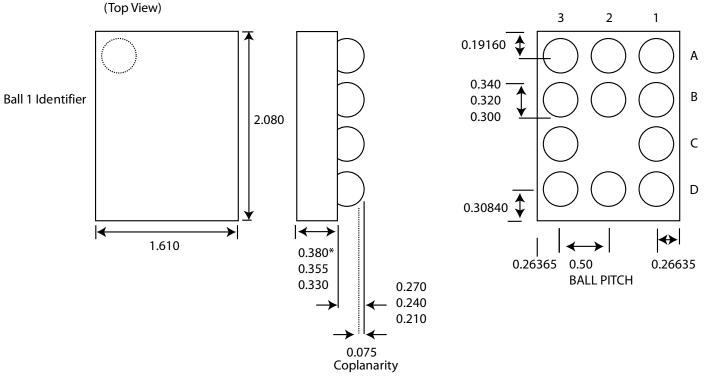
Wafer Level Chip Scale Package (WLCSP) (CB) Dimensions shown in millimeters
